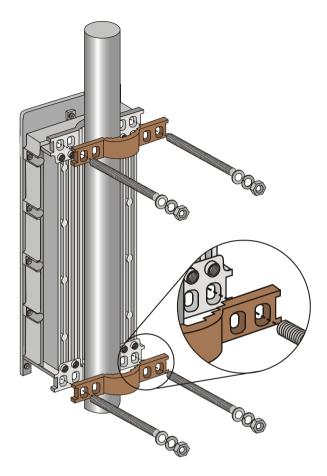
AU-RE 3" Pole Mounting Installation Using the Supplied Brackets
